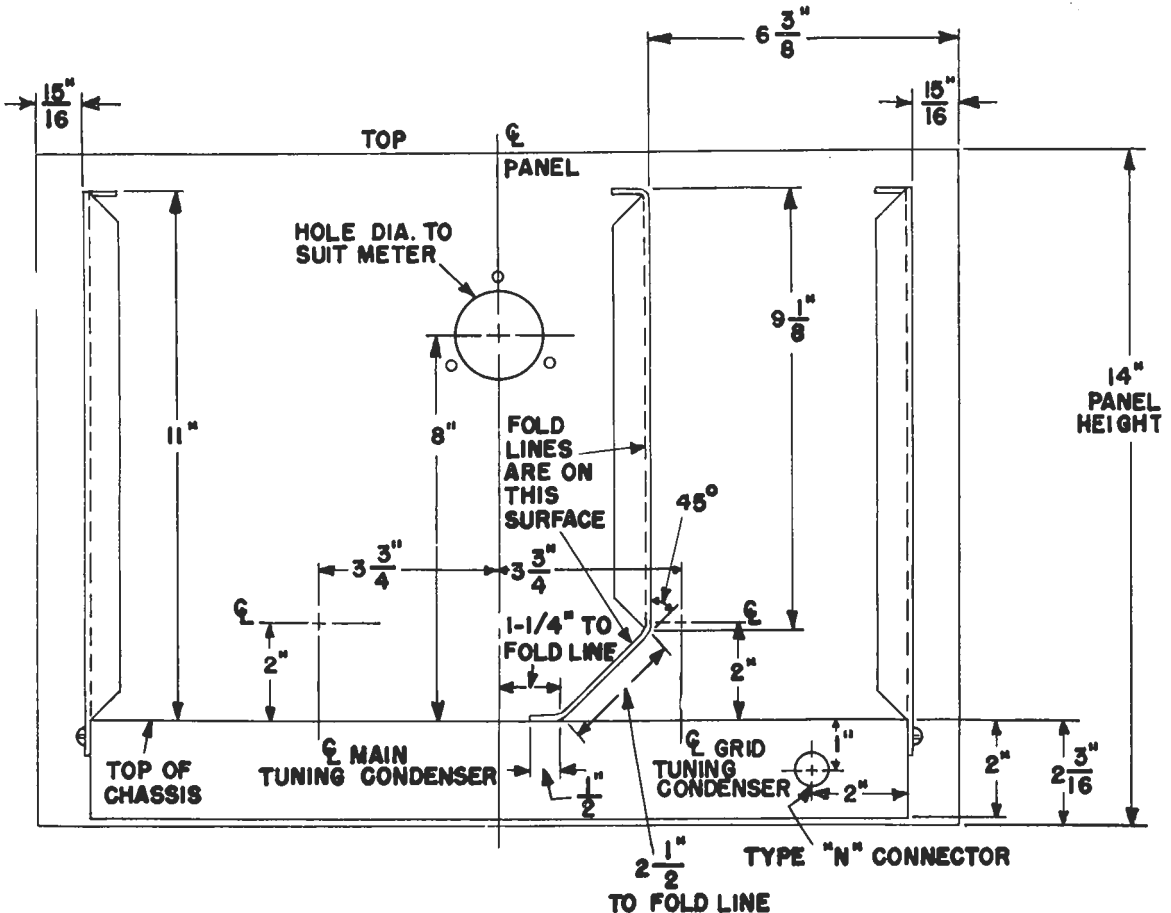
Detail of Chassis and Panel Assembly (Rear View)
